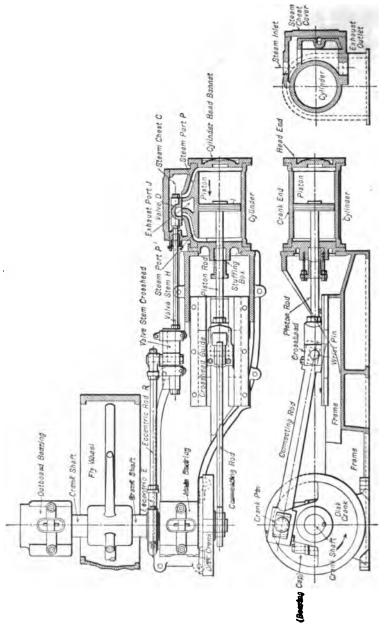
RECIPROCATING STEAM ENGINE FIXED OUT OFF-THROTTLING GOVERNOR.
